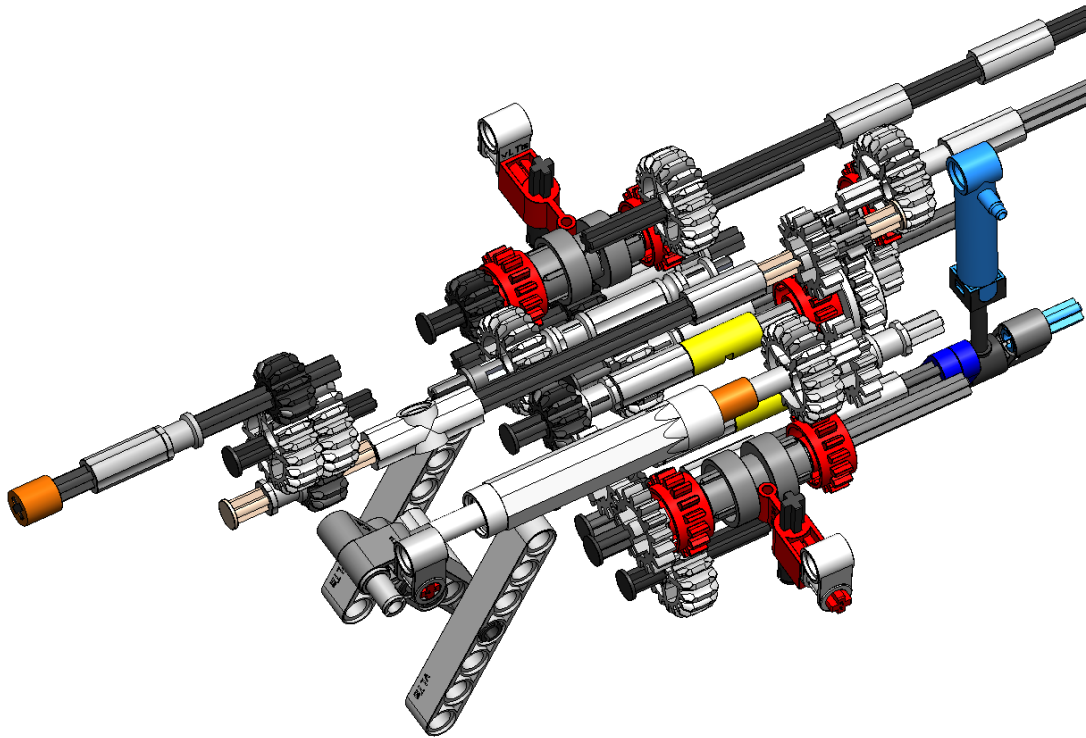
LTM\_42043-2 >"G" in SolidWorks® 2020 > A detail of the axis from the engine and how that power can be distributed through gears depending on the wanted option.
